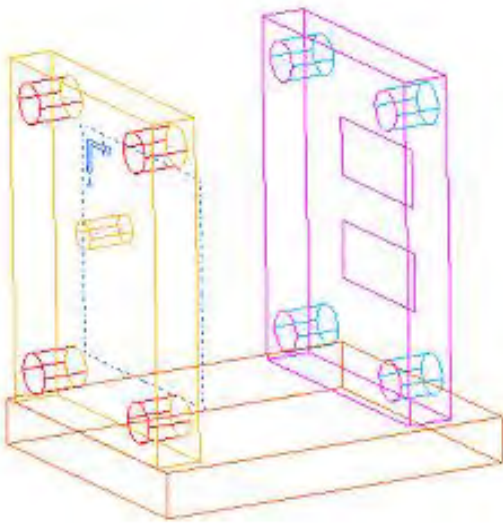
A: Machine Base Cover Platen And Cove Platen
